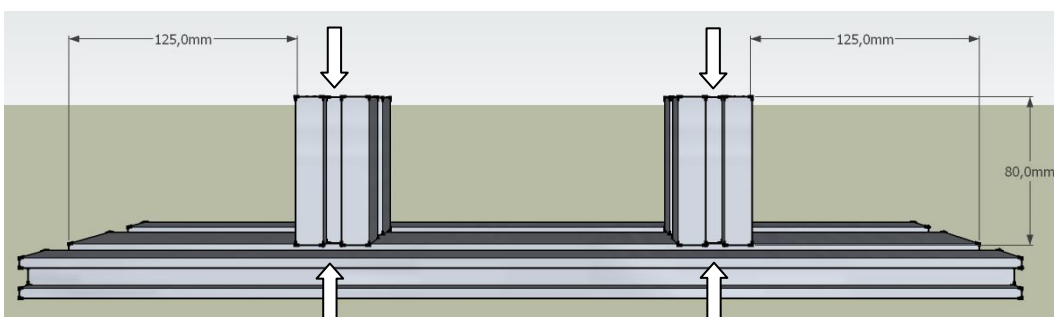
Dimensions of the lower lab box connection. Arrows indicate screws bolted in the central cylinder of the aluminium profiles.
